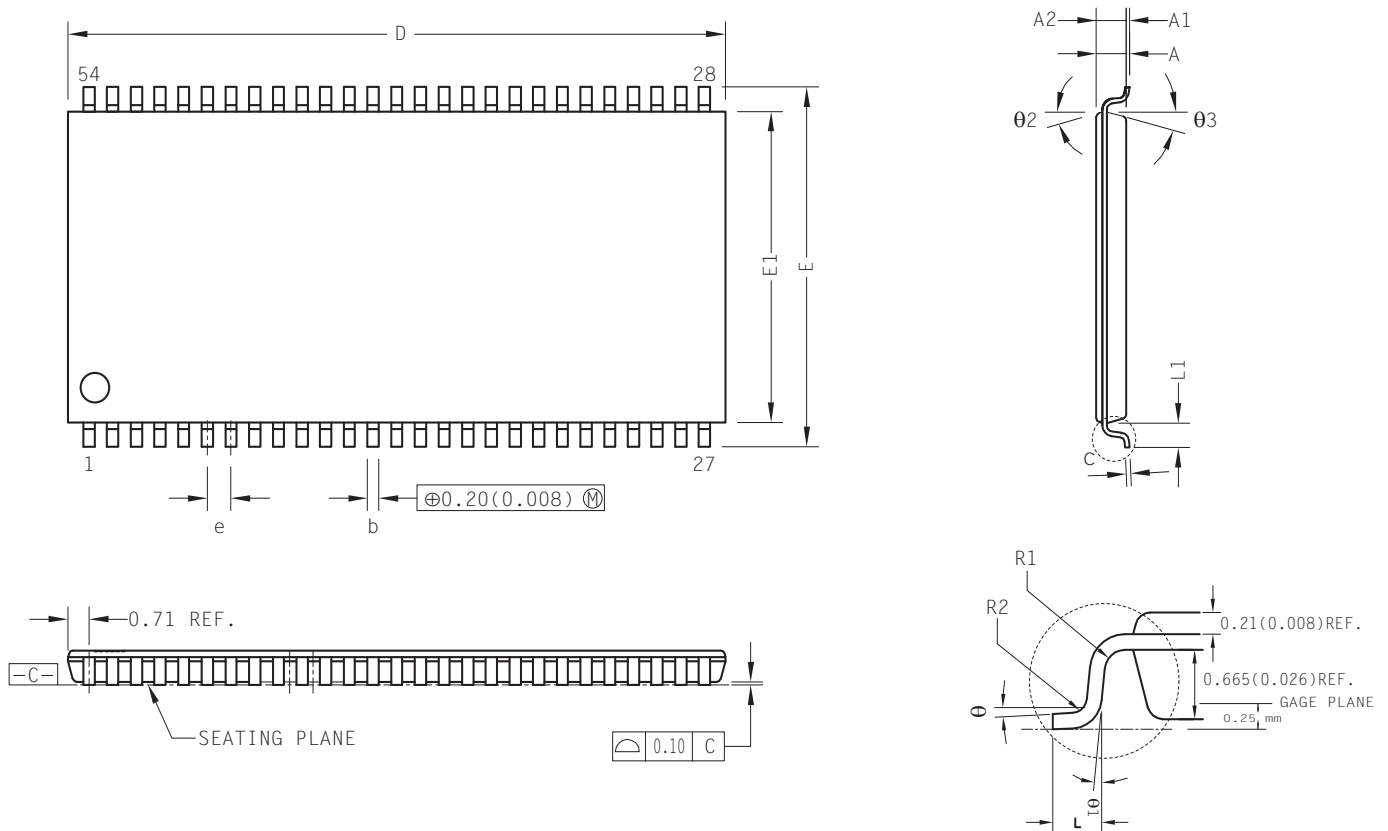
54-TSOP2 Package Outline Drawing - Cont'd
